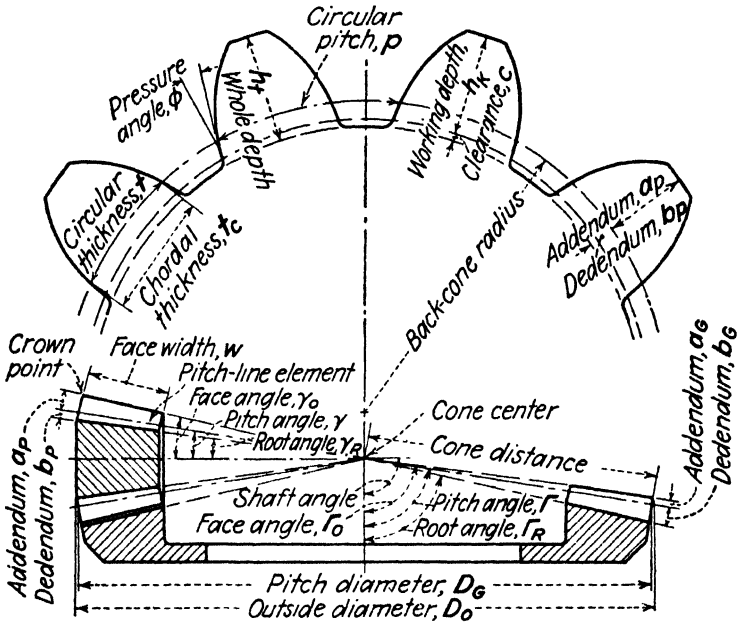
NOMENCLATURE AND SYMBOLS FOR BEVEL GEARS.
